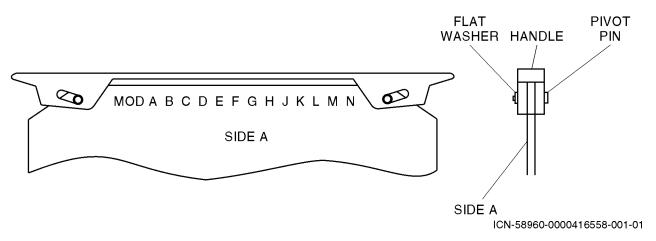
Adjust Tooling and Attach Handle to PWB with Pivot Pin and Flat Washer
